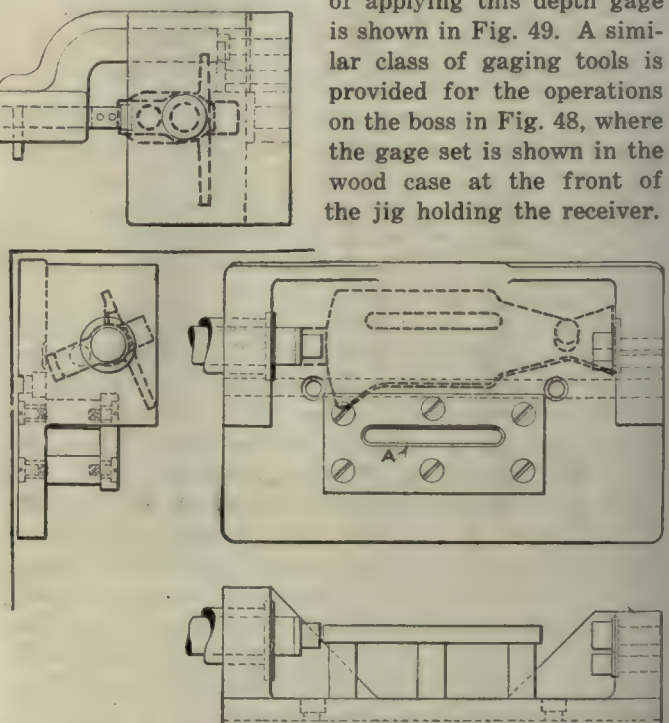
PROFILING FIXTURE FOR EJECTOR CLEARANCE CUT
